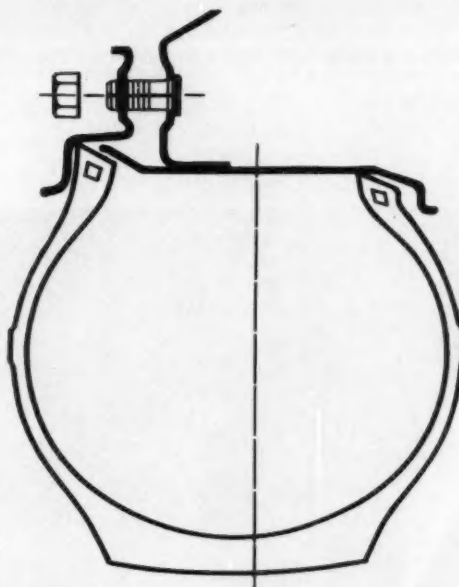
Easy removal of flat tires and equally simple replacement with substitutes features the Taper Lock rim. The rim has different bead tapers and the outer flange is removable; freeing the flange frees the tire beads.
